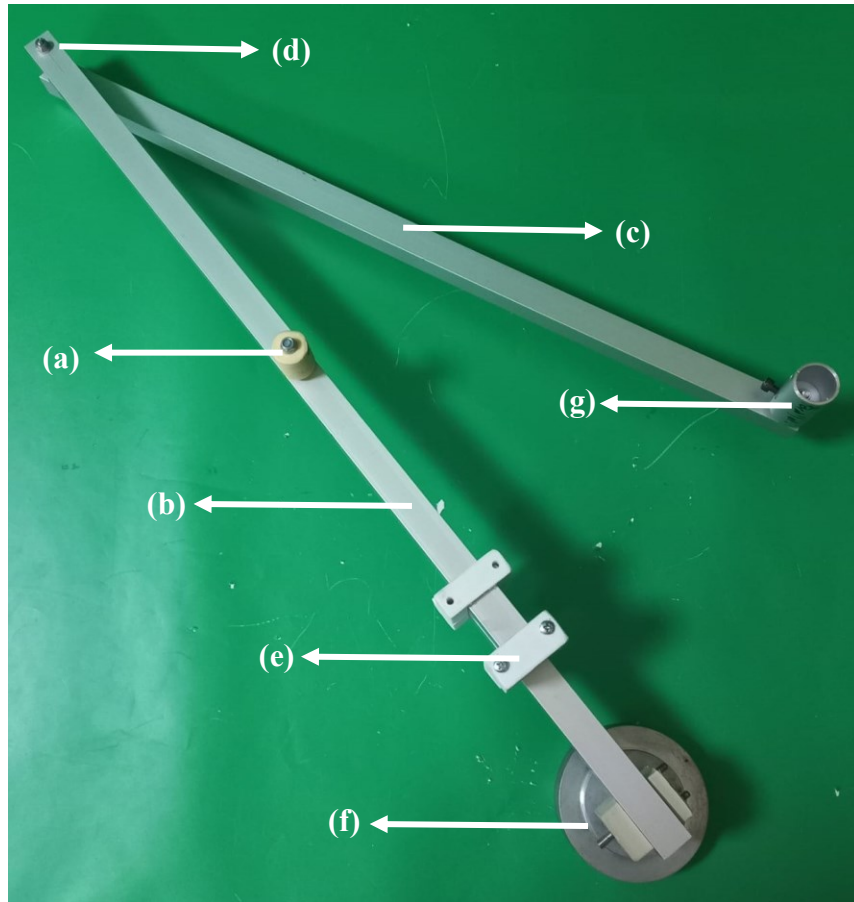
Completed assembly of one side of parallelogram and all parts of it
